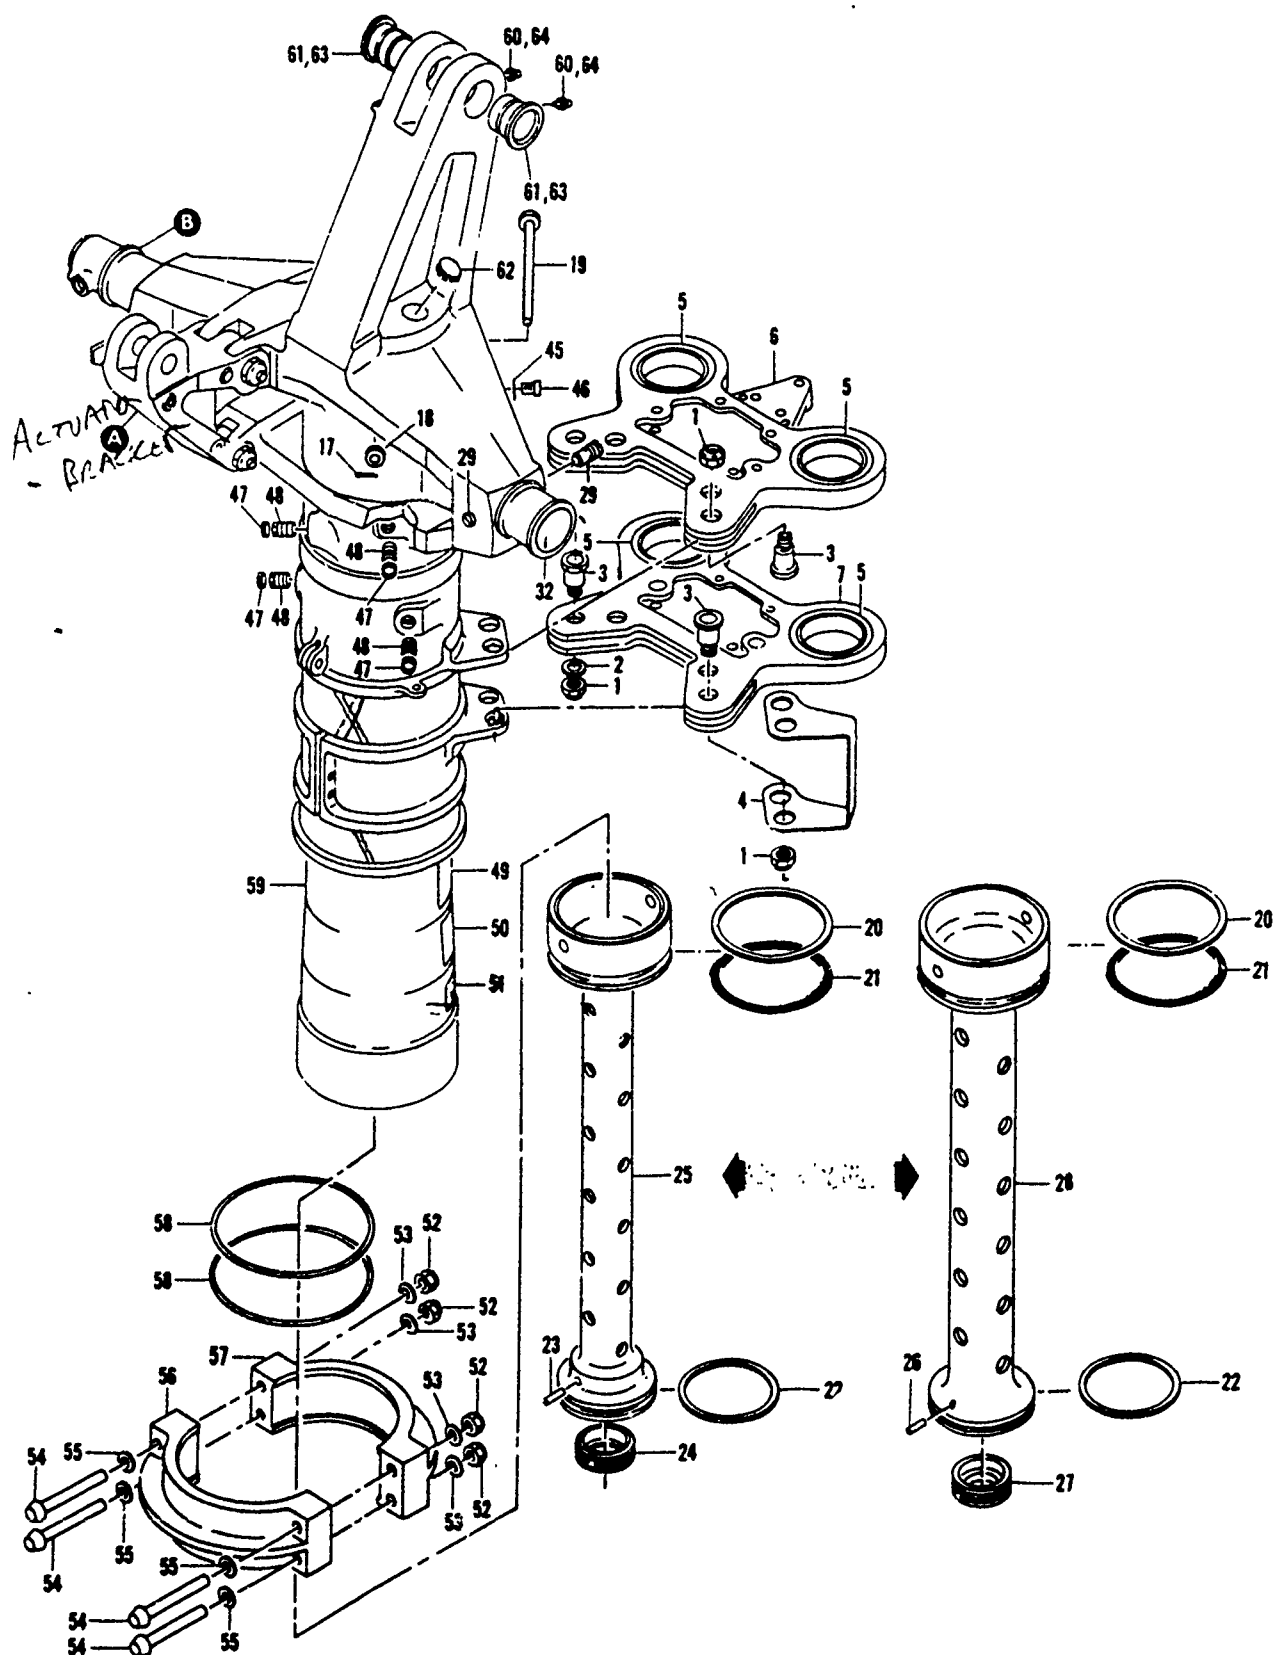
Nose Gear Outer Cylinder Assemblies (Sheet 1 of 2)
